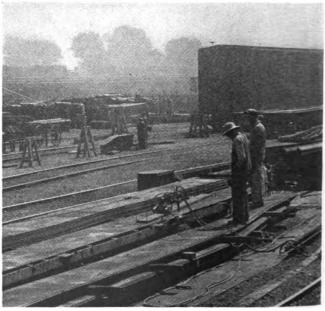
Radiagraph cutting machine used for trimming side-sill plates to size
